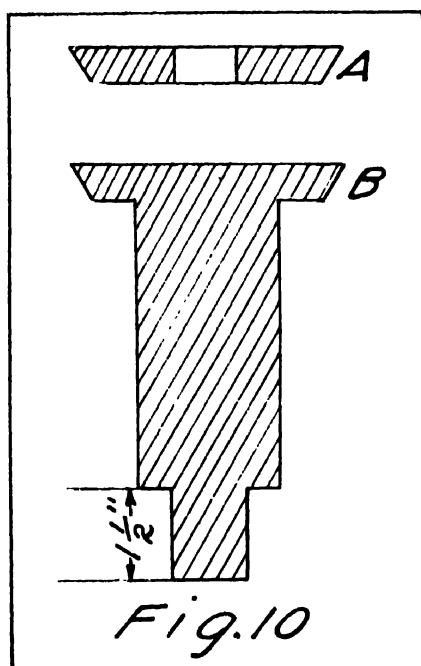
A IS A DISK CORE WITH A HALF INCH HOLE IN THE CENTER B IS A SECTION OF PIN BRASS PATTERN WITH A $\frac{1}{2}$ -INCH CORE PRINT AT THE BOTTOM AND A DISK CORE PRINT ATTACHED TO THE TOP
